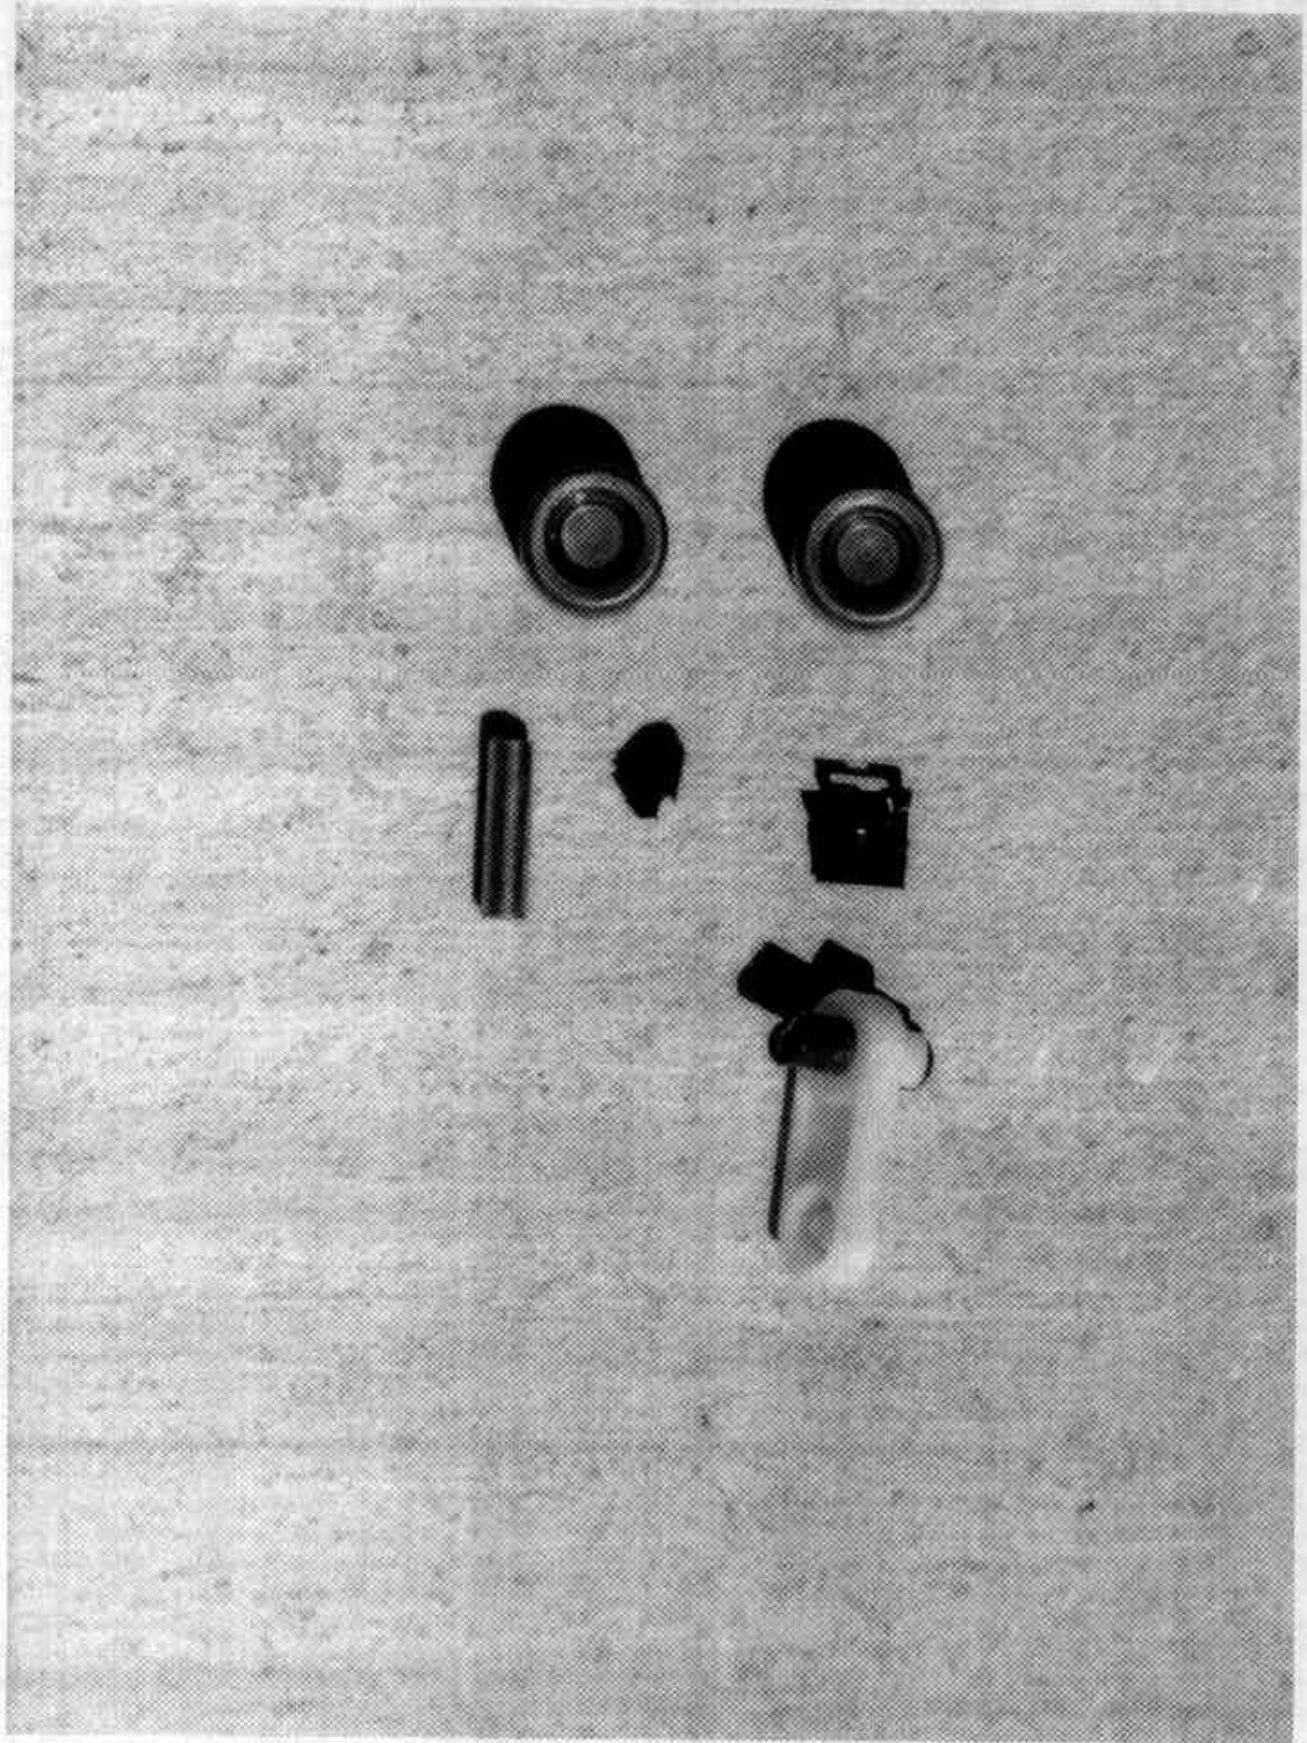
DRIVER SEAT BROKEN PARTS
